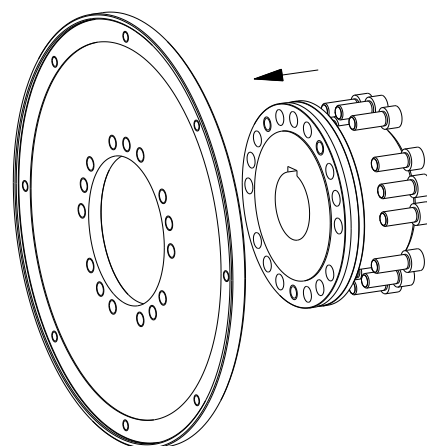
Assembly of the additional flange with the coupling flange (type HEW-ZS (size 100 to G 125))
